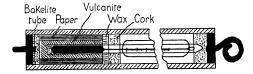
Section of mounted thermometer (Overall length, 35 cm).
